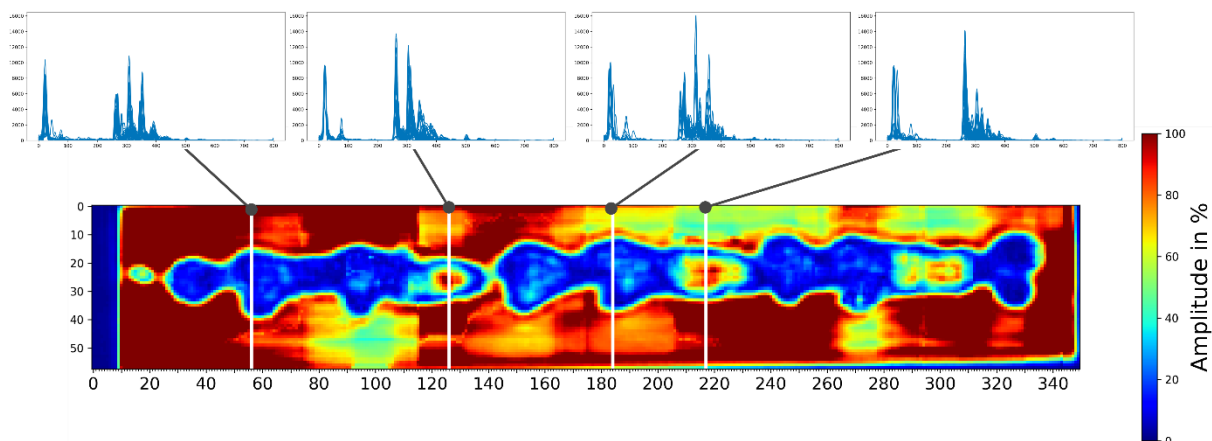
Investigation of defective welding sample with the Ultrasonix transducer (top) and water ultrasound (bottom). White lines indicate the position of measurement.
